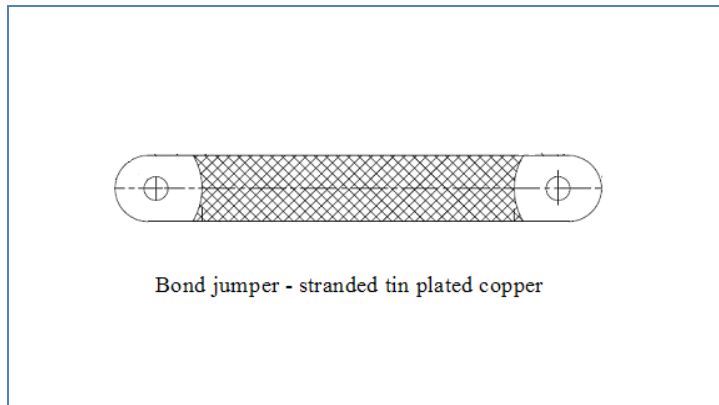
Aircraft rudder bond jumper design detail (dimensions retained)
